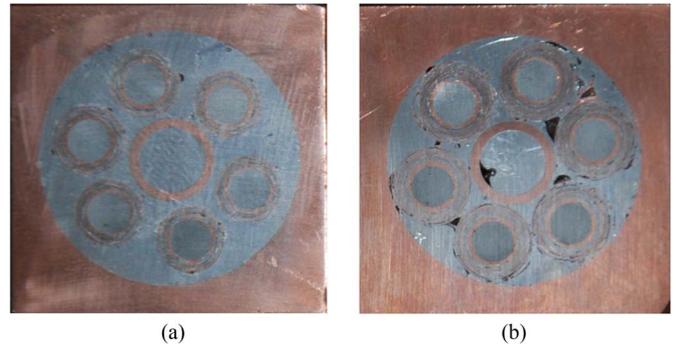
Two cross-sectional views of the solder-filled demonstration joint. Six trimmed dummy strands positioned around a copper tube. (a) and (b) Cross sections from the bottom and top of the joint terminal. Gas pockets are visible as small black spots in the pictures.
